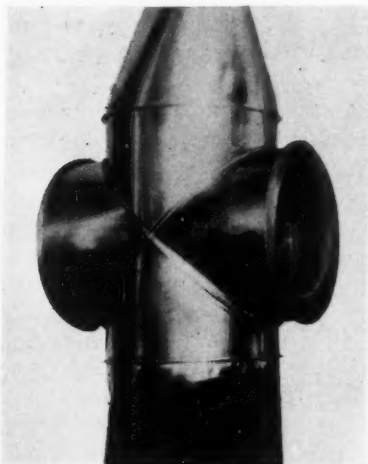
By a technique which involves immersion of the parts in carbon tetrachloride, tantalum sheets 0.005-inch thick are arc welded
